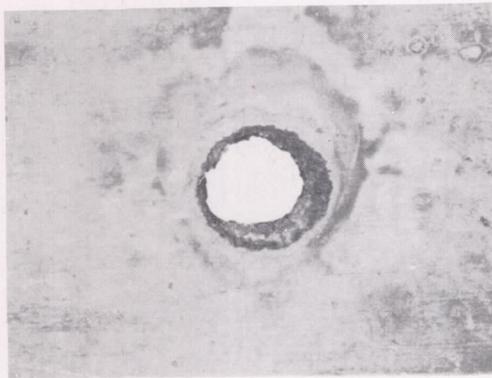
Type P. Weld completely penetrated by corrosive attack, X3.
